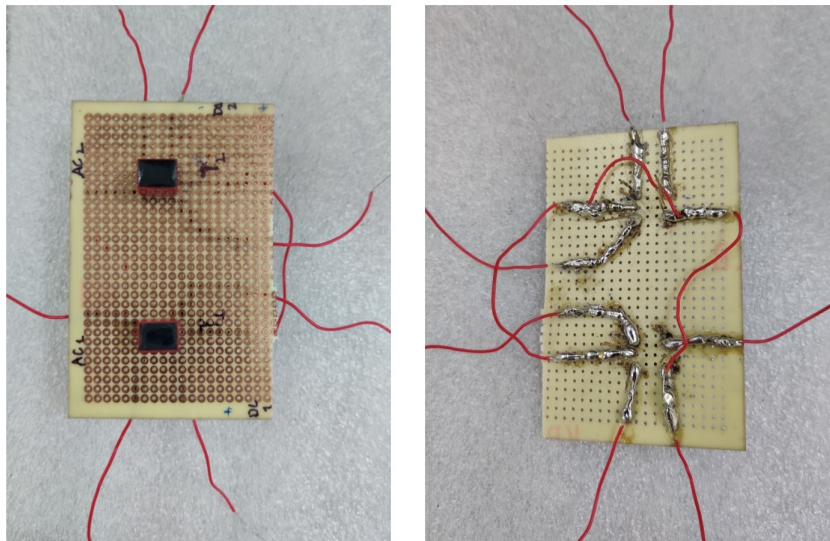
Front and back view of the soldered AC+DC summer PCB. The PCB contains 2 such circuits.
